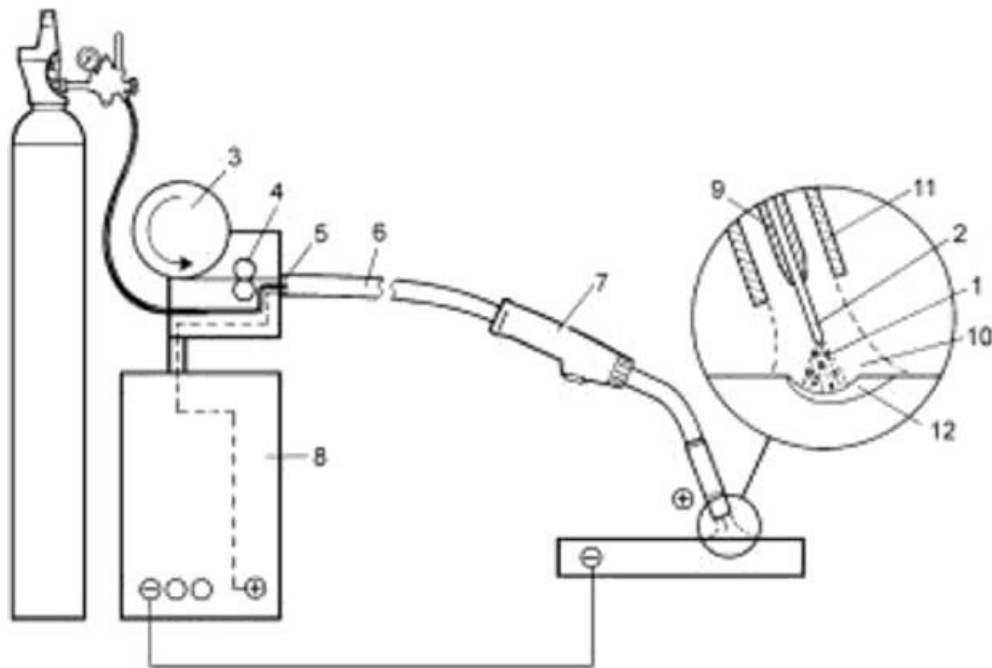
MIG welding (*Mig Welding Guide, n.d.*).
